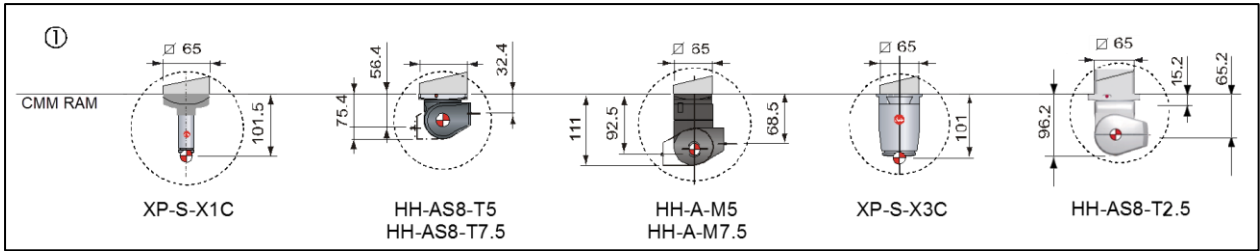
Overall Dimensions of the Machine - 07.yy.07 Models
